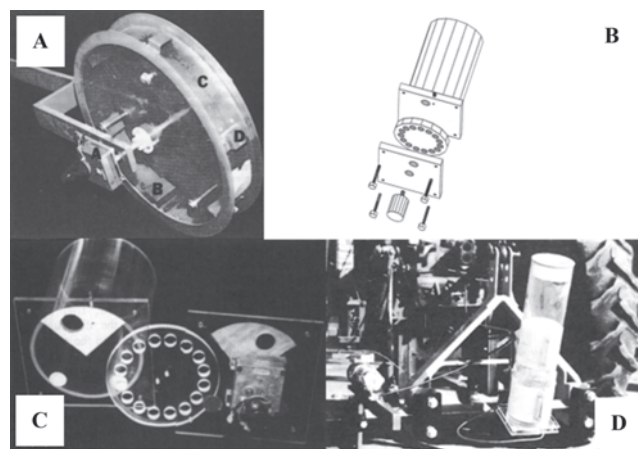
A) Rotating container with transparent sides: a) gearmotor; b) internal Z-brackets; c) outer ring; d) external brackets; B) mechanical distributor; C) distributor components; D) distributor fit on the tractor tool bar. [Reproduced from: "Mechanical release of predacious mites for biological pest control in strawberries" by D. K. Giles, J. Gardner, and H.E. Studer. Transactions of the ASAE 38(5), 1289-1296. Copyright 1995 American Society of Agricultural Engineers. Used with permission.]
